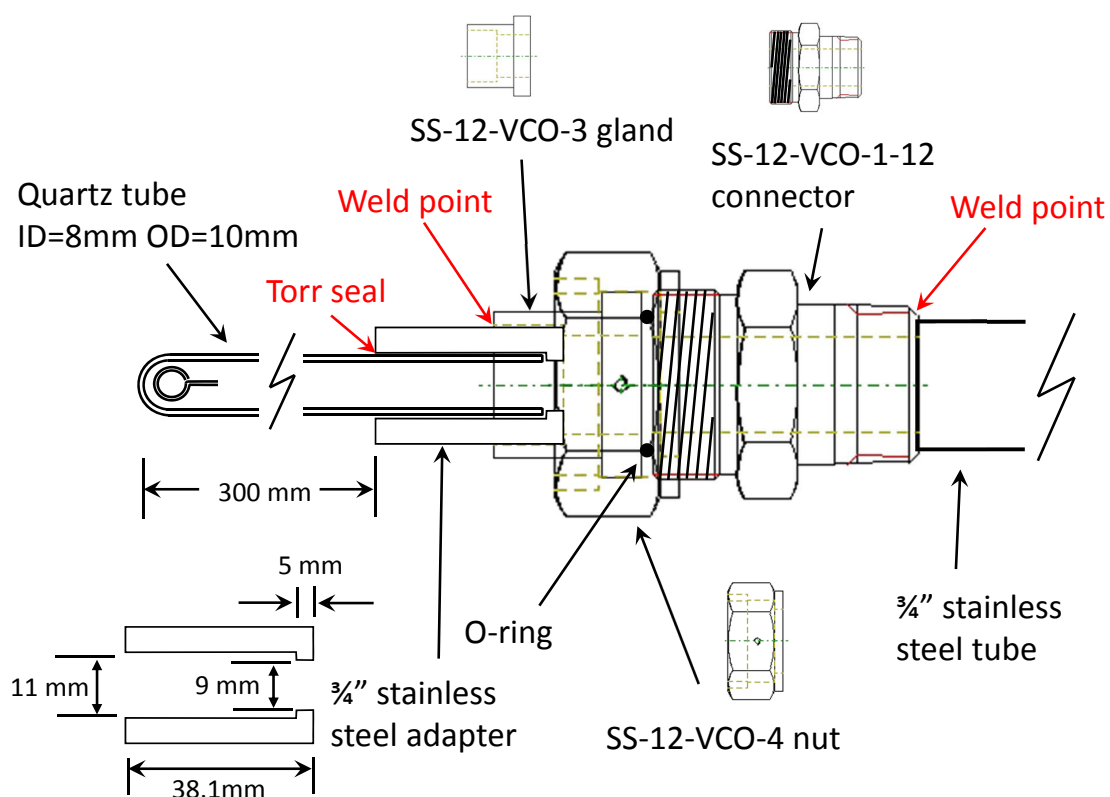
Drawing of the vacuum assembly of the 3D magnetic probe. See the text description for details.
